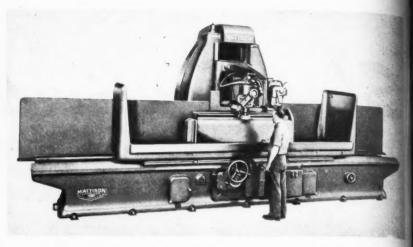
Precision Vertical-spindle Way Grinder Built by the Mattison Machine Works
